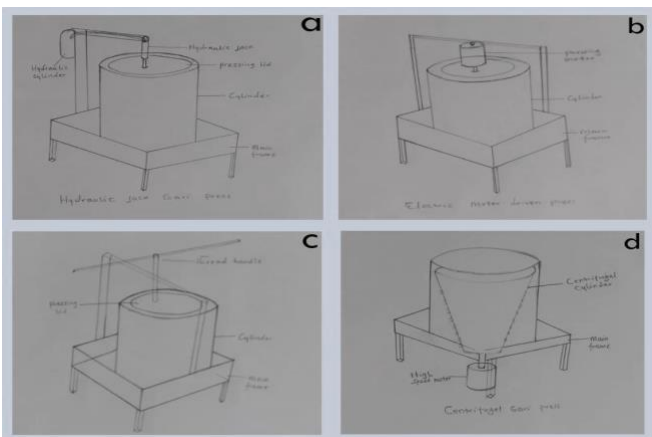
(a, b, c, d) show the four sketches of the design solution ideas for the identified problem (hydraulic jack gari press, electric motor driven press, torsional compression thread based Gari Screw-type Press, centrifugal press)
